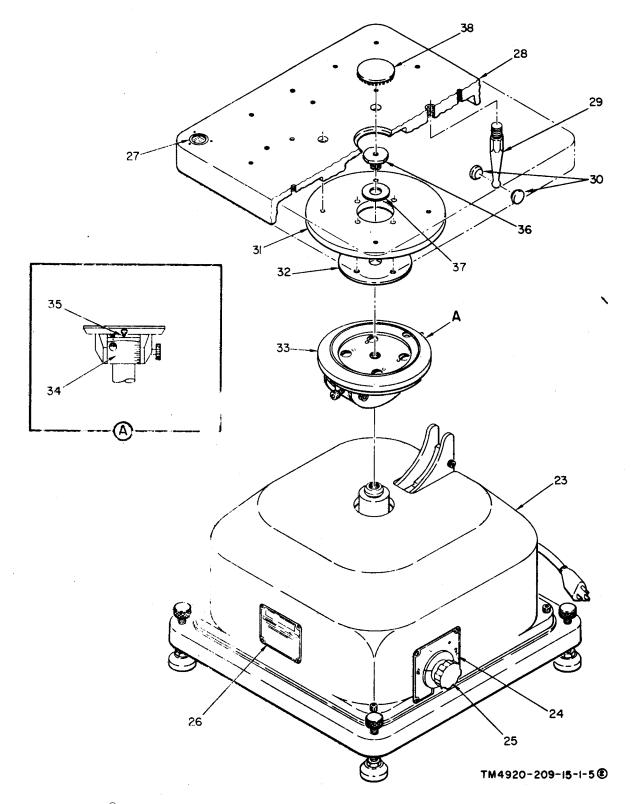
@ . Table, Tilting, Gyro Instrument Testing MX-4042A/12, exploded view (sheet 2 of 2).
